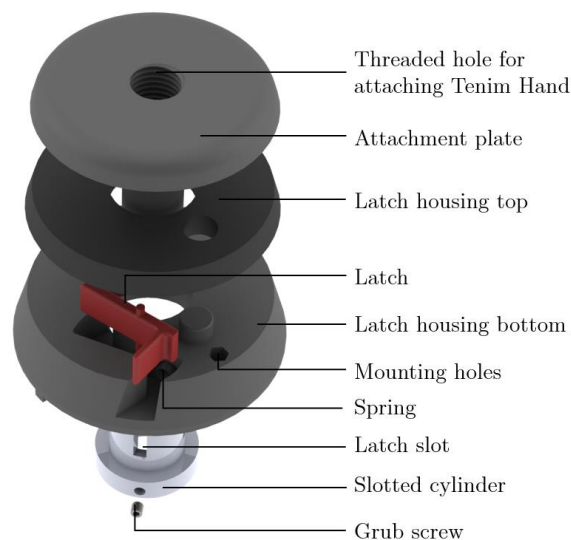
Exploded view of the components of the wrist adjustment mechanism
